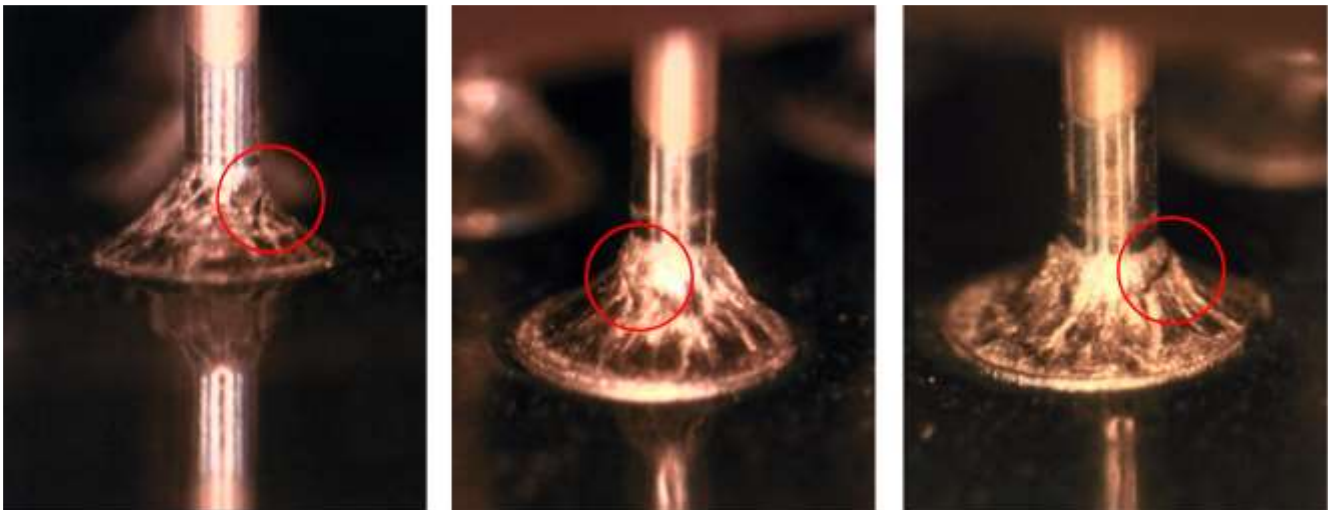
Micro-fractures on the package pin solder joints, highlighted by red circles.
